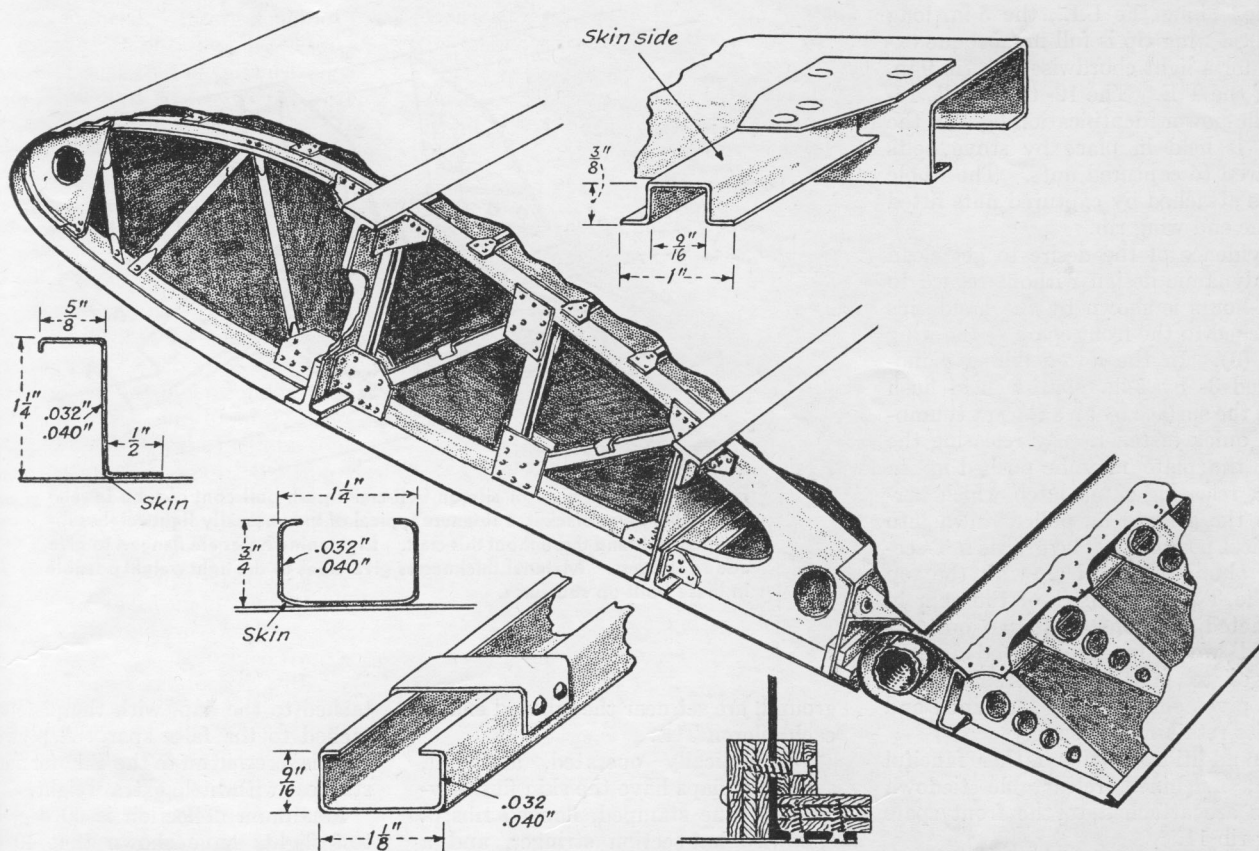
Cross-sectional view of the wing and aileron, with detail sketches showing dimensions of the various elements and illustrating the use of plywood as a stiffener at the bottom of the false spar to which the aileron is attached, and showing how C sections of inter-spar truss members are reinforced with small riveted clips.
